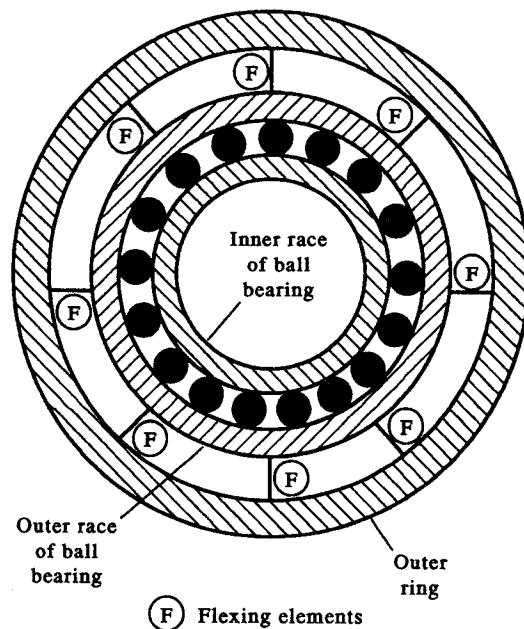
Outer race of ball bearing is attached to static outer ring through torsional flexing elements [from Clingman (1991), courtesy of publisher].
